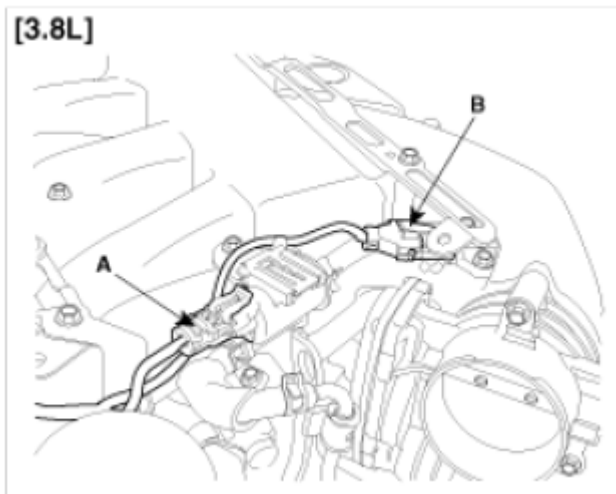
Identifying ETC Connector And Knock Sensor Connector
